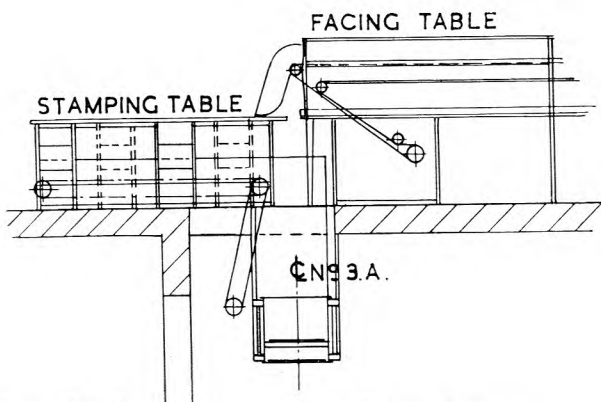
FACING AND STAMPING TABLE CONVEYORS.
